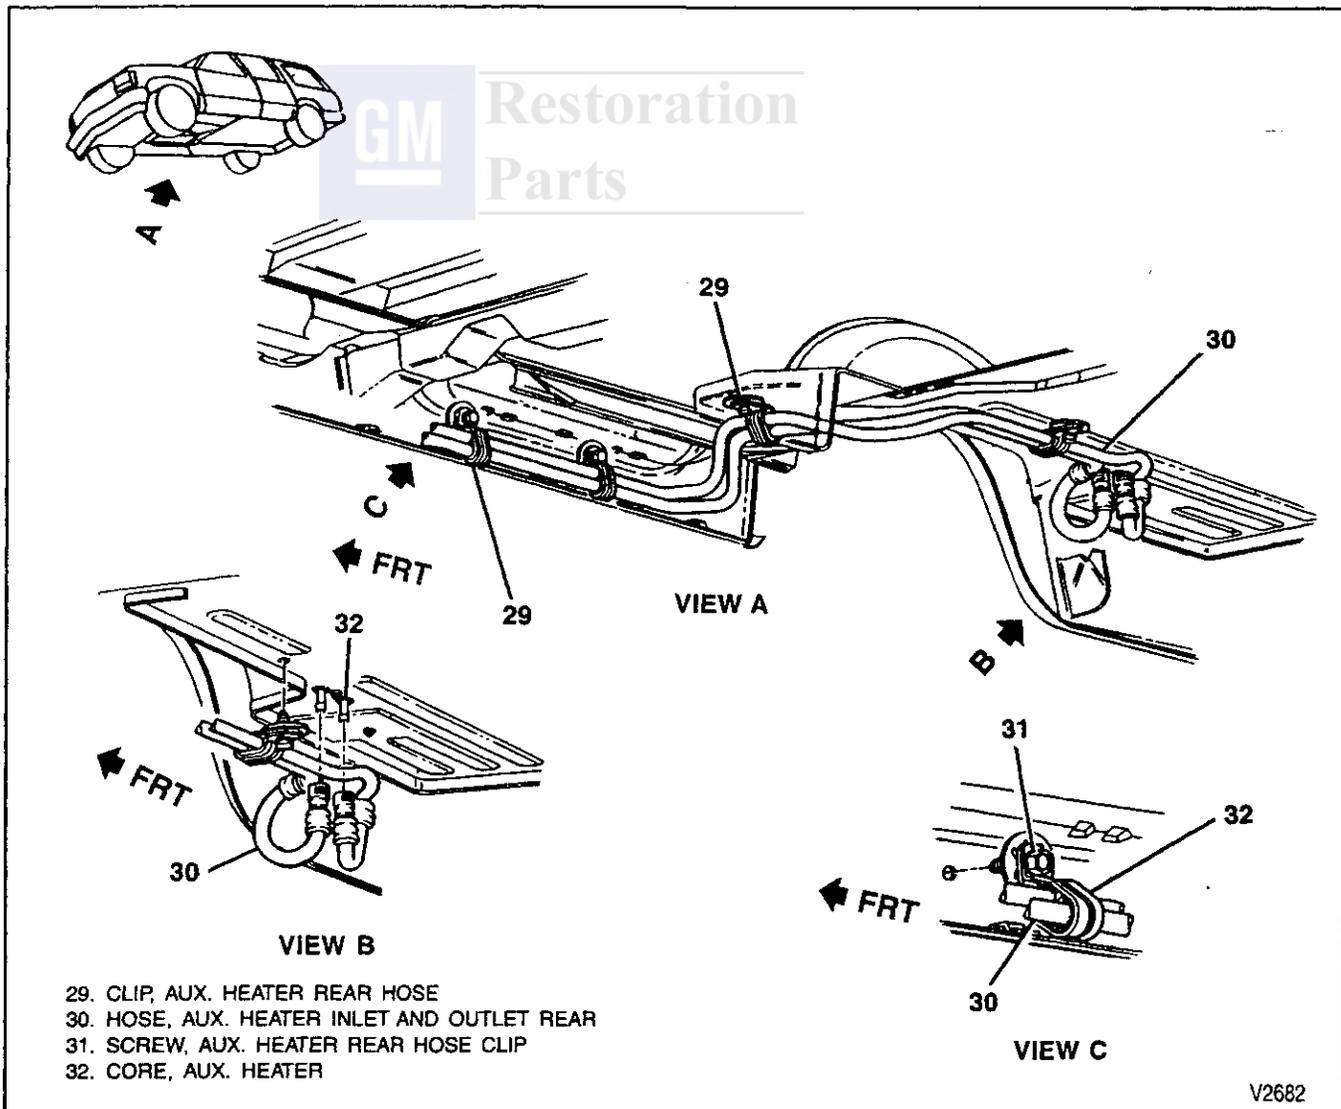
Auxiliary Heater Hose Assembly Routing (Rear)
